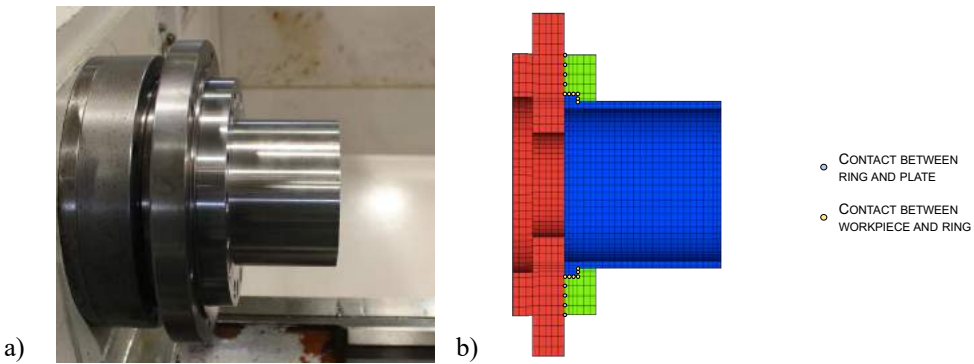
a) Workpiece mounted on the lathe b) workpiece model
